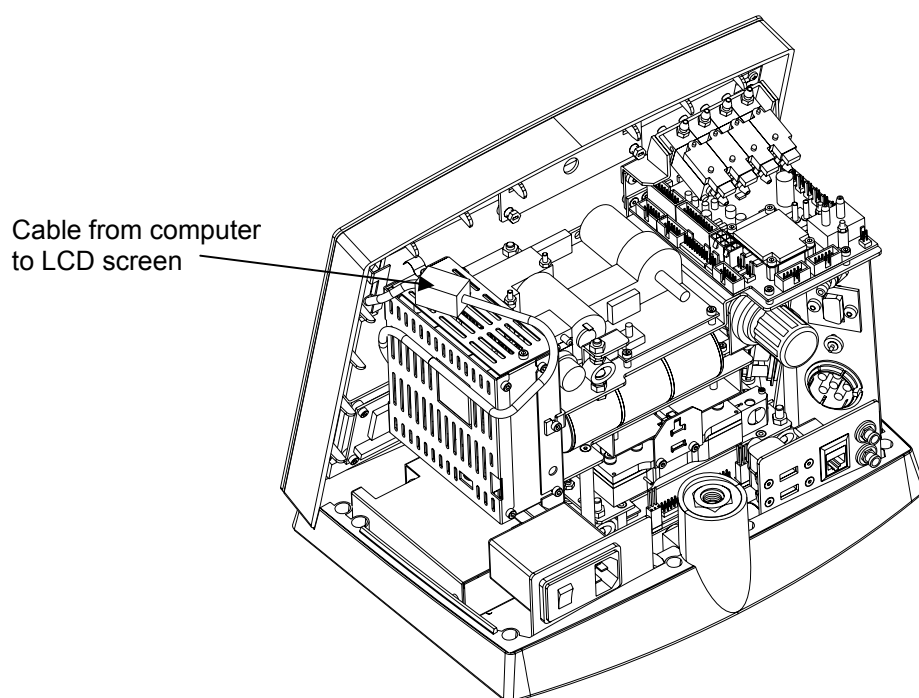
Assembly cabinet – location of cable between computer and screen.
